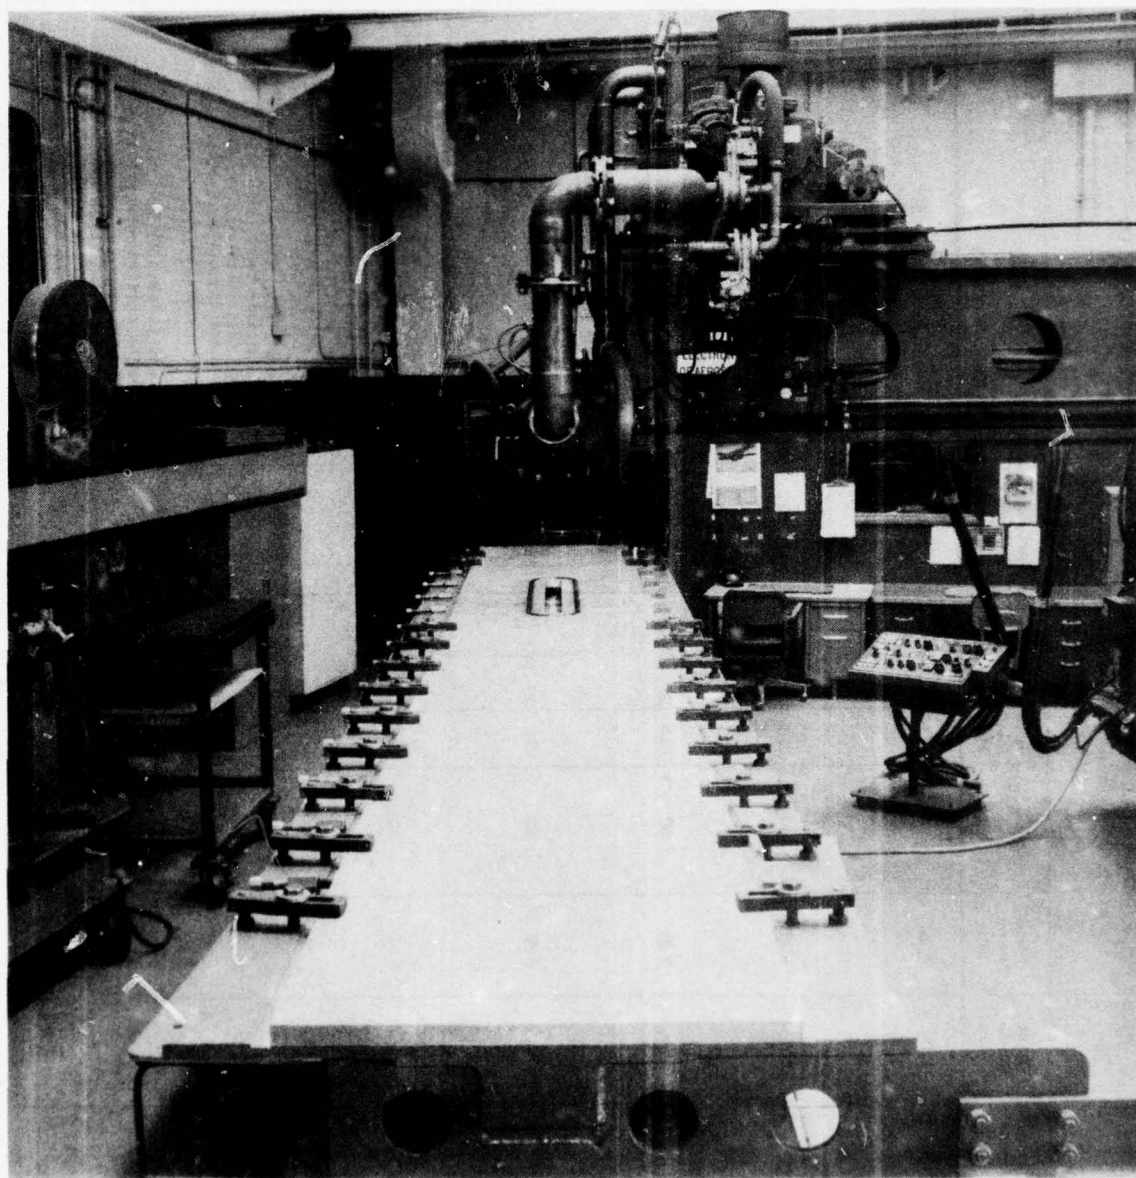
Aluminum Cover Plate on Flat Plate Welding Fixture
